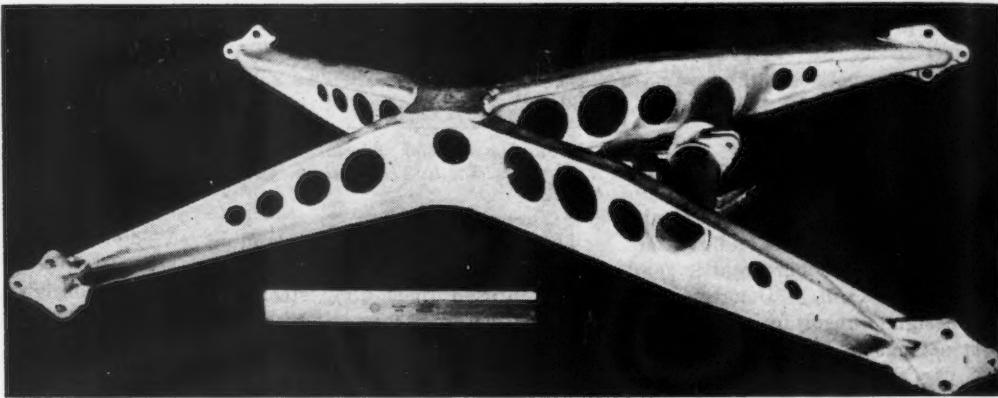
Forged steel bolted truss construction of C-47 cargo plane landing gear.
